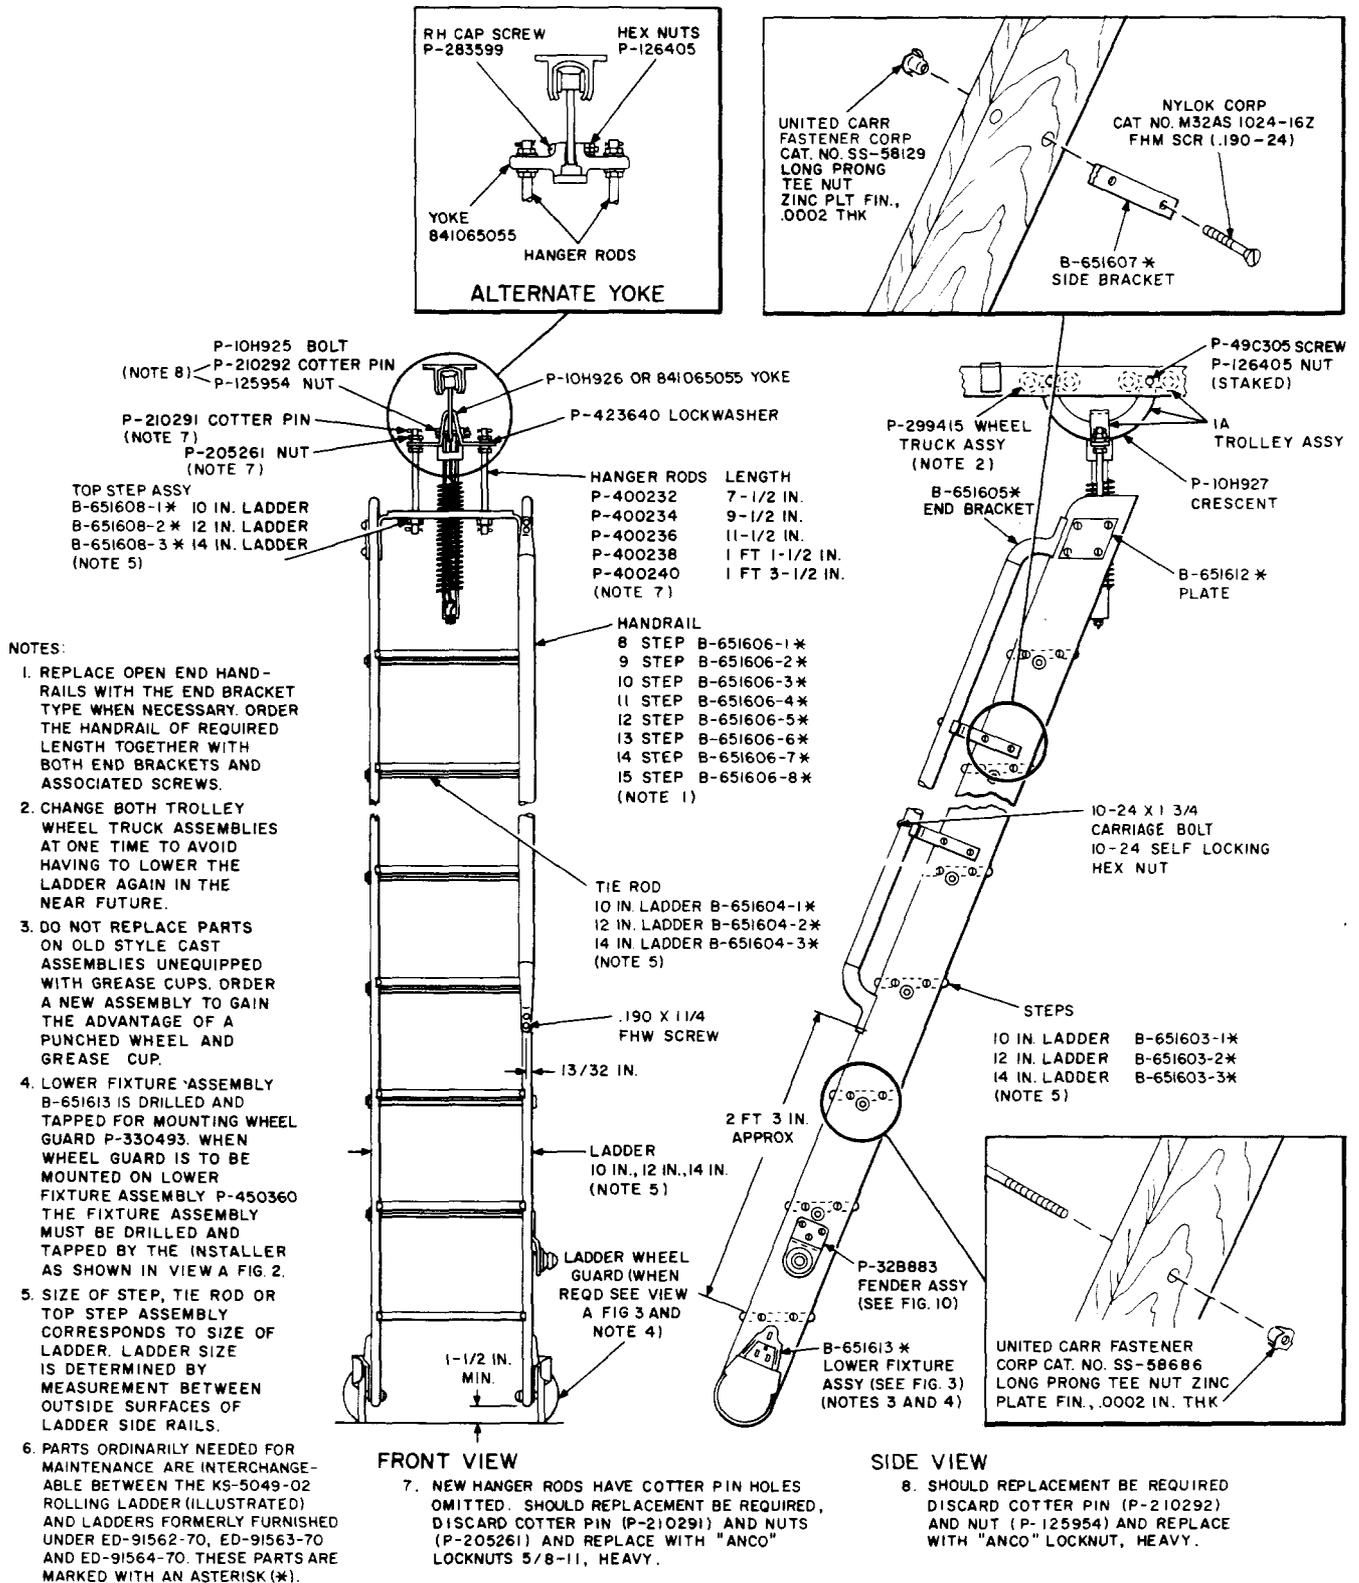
Straight-Type Rolling Ladder, KS-5049-02
